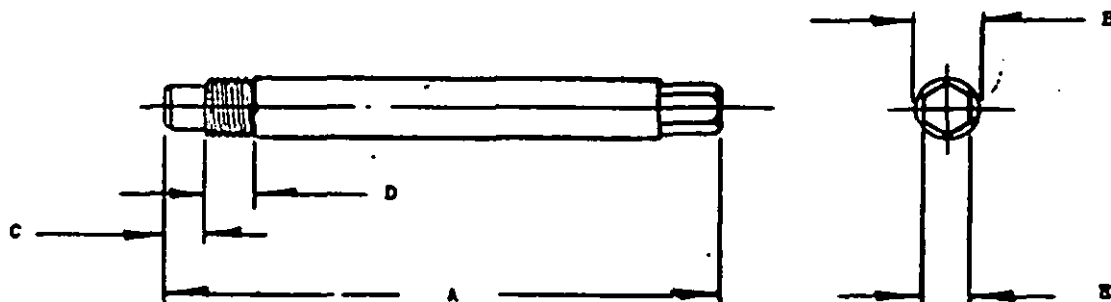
Type III, class 4, offset tools, spark plug threads.
